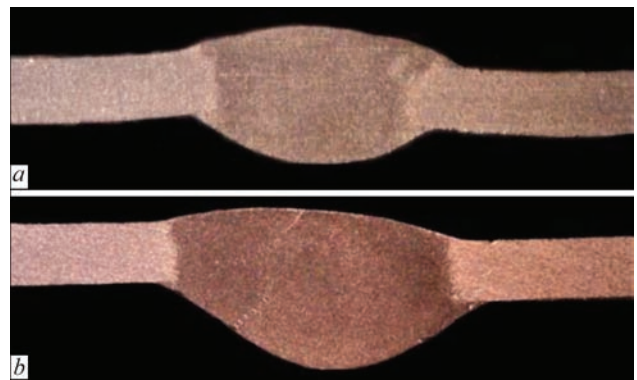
Macrosections of welded joints of B1341 alloy produced by manual argon arc welding at different technological methods of welding using nonconsumable electrode: *a* — free arc; *b* — constricted arc
